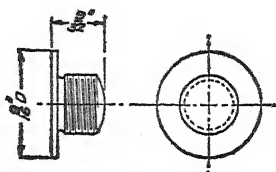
The Filler Cap Produced in Accordance with Table I.
